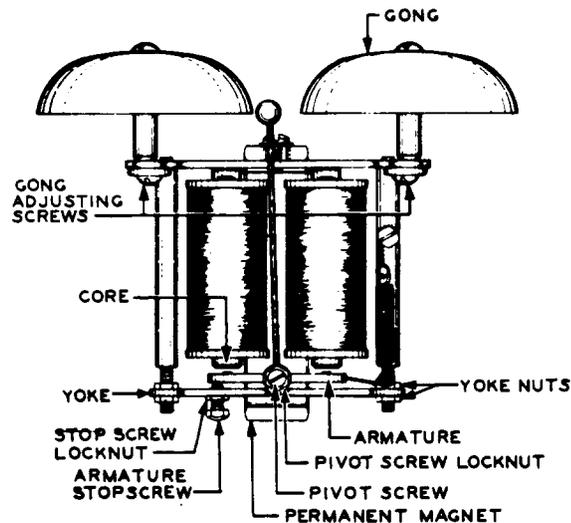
Adjusting Screws for 6-, 7-, 8-, and 42-type Ringers
